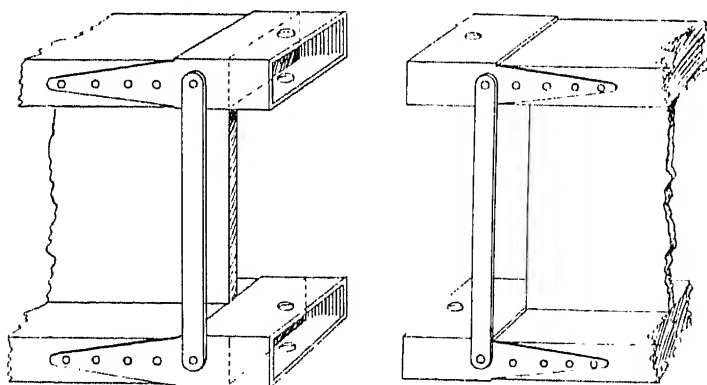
Wing Spar Fitting—" Darmstadt " Type.
